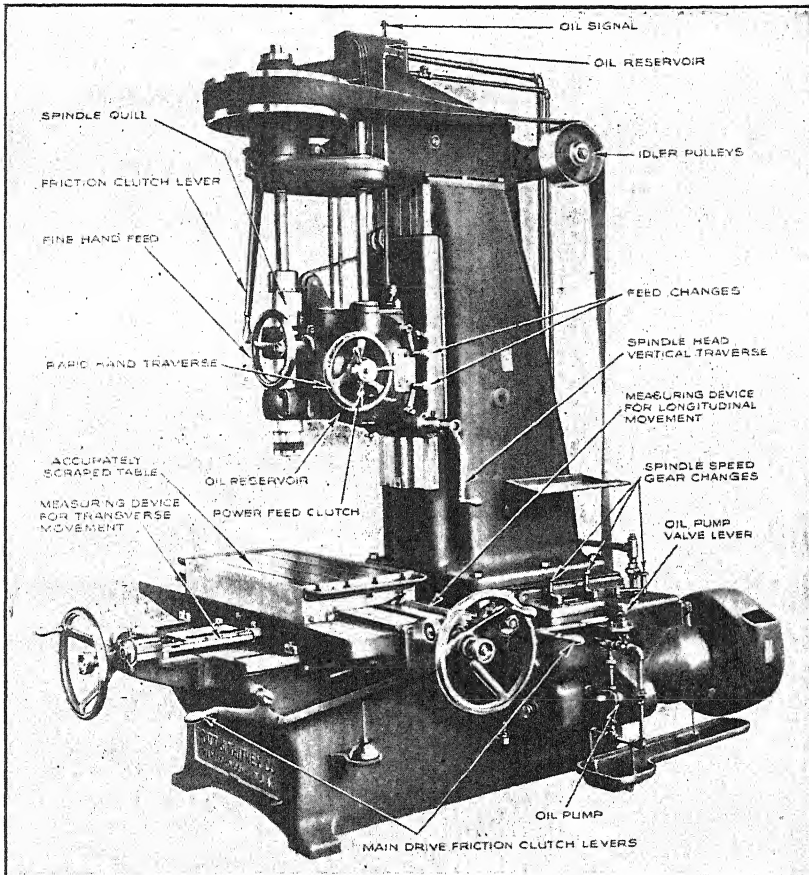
The Pratt and Whitney Co. No. 2 Jig Boring Machine for Work Requiring High Precision.
